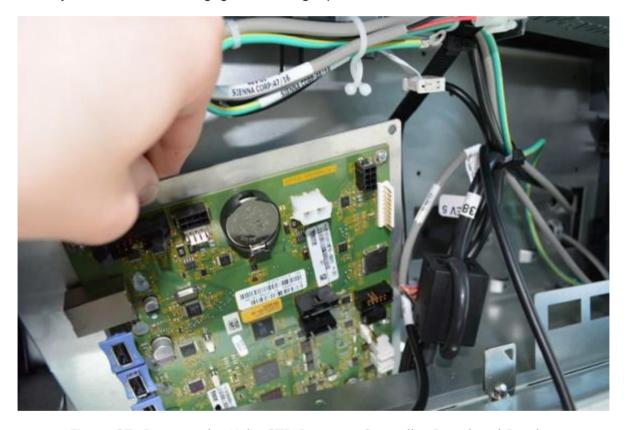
Remove the Helix STD Payment Controller Board and Bracket
